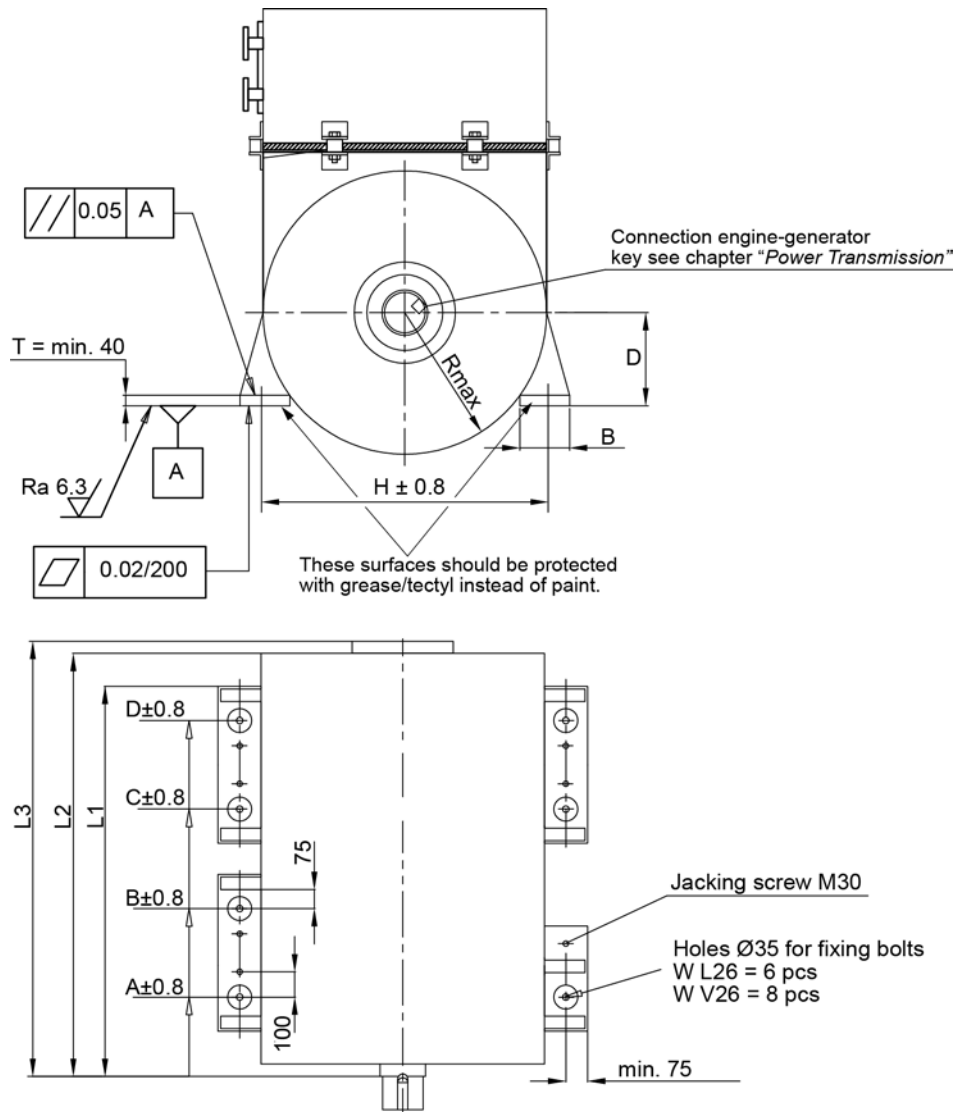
Distance between fixing bolts on generator (9506ZT733B)
